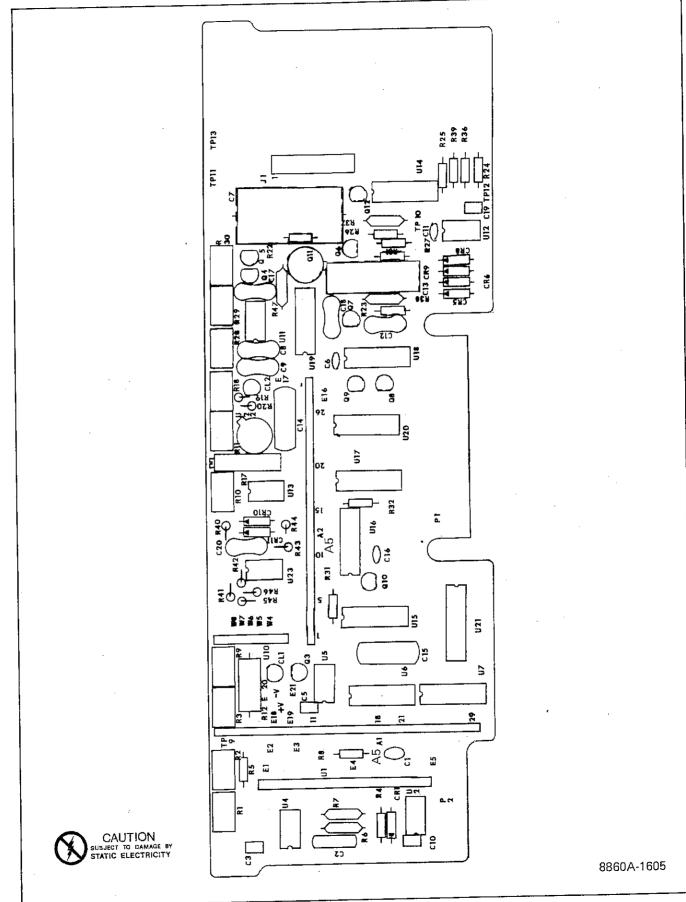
A5 A/D and Ohms Converter PCB Assembly
